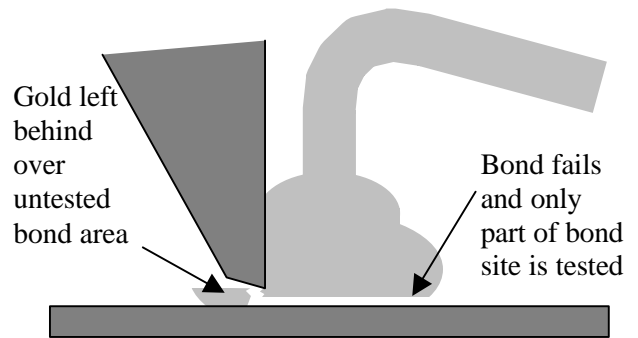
Sectional view through ball bond at yield/bond failure using a chisel tool
